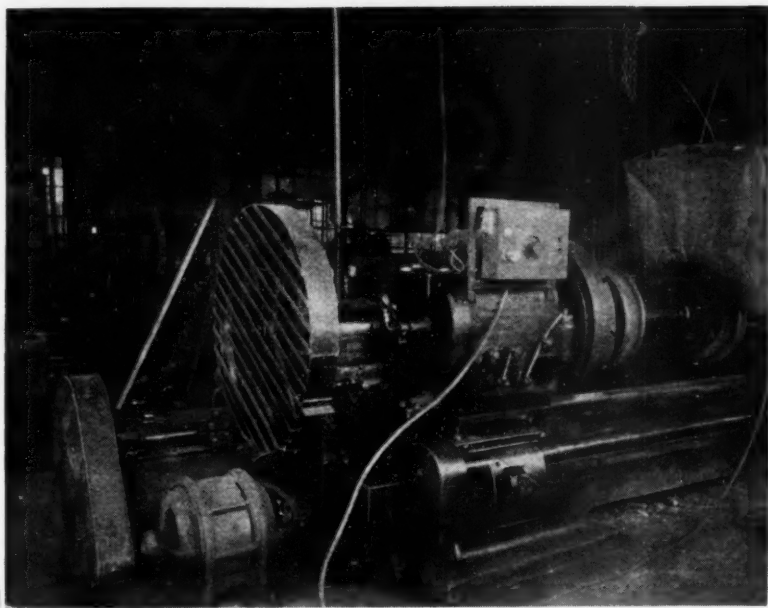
Lathe Specially Fitted for Tire Welding and Arc Shield in Place Over Welding Head
